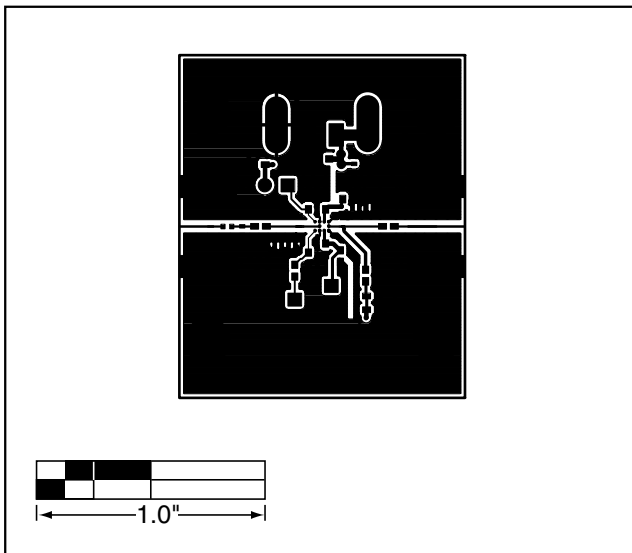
MAX2841 EV Kit PC Board Layout—Primary Component Side
